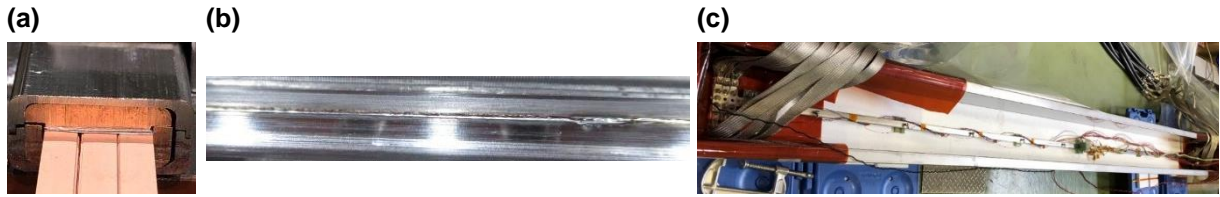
Photographs of the fabricated STARS conductor: (a) cross-section of an end section before attaching a current-feeder terminal, (b) laser welded splice of the stainless-steel jacket, and (c) entire sample installed in a container for liquid nitrogen cooling.
